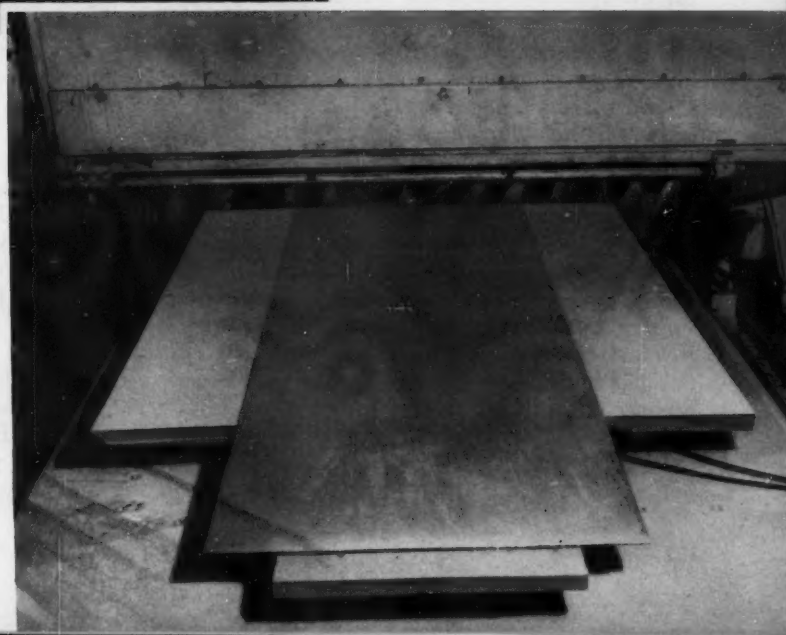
Modified hydraulic planer being used for flat-grinding operation on a large section of honeycomb core.
